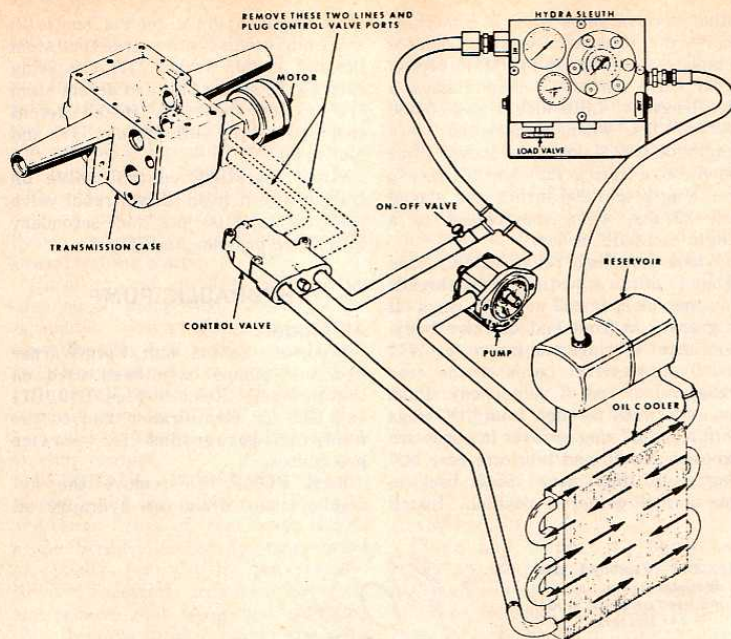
View showing "Hydra Sleuth" tester installed to check flow and pressure of hydraulic drive system.
